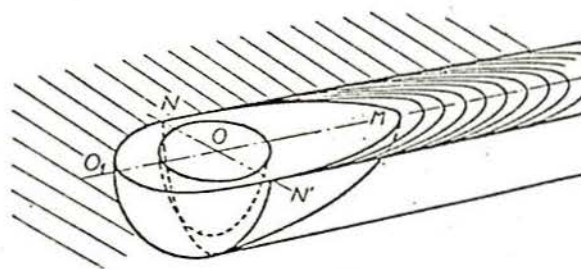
Schematic Representation of the Spatial Weld Pool Shape (see text). / 63 /.
